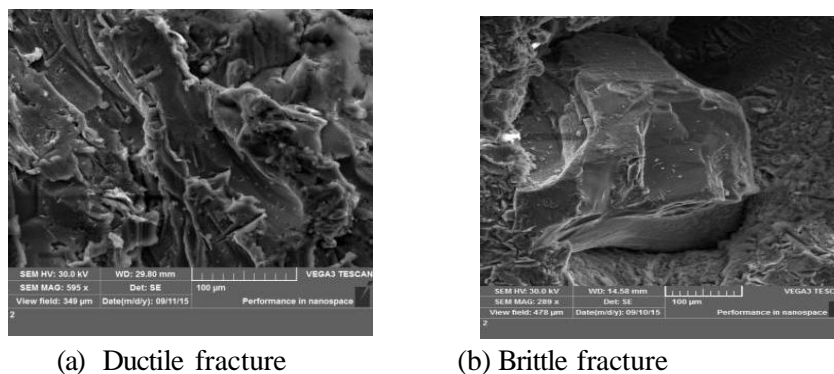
SEM image (a) ductile fracture (b) brittle fracture.
